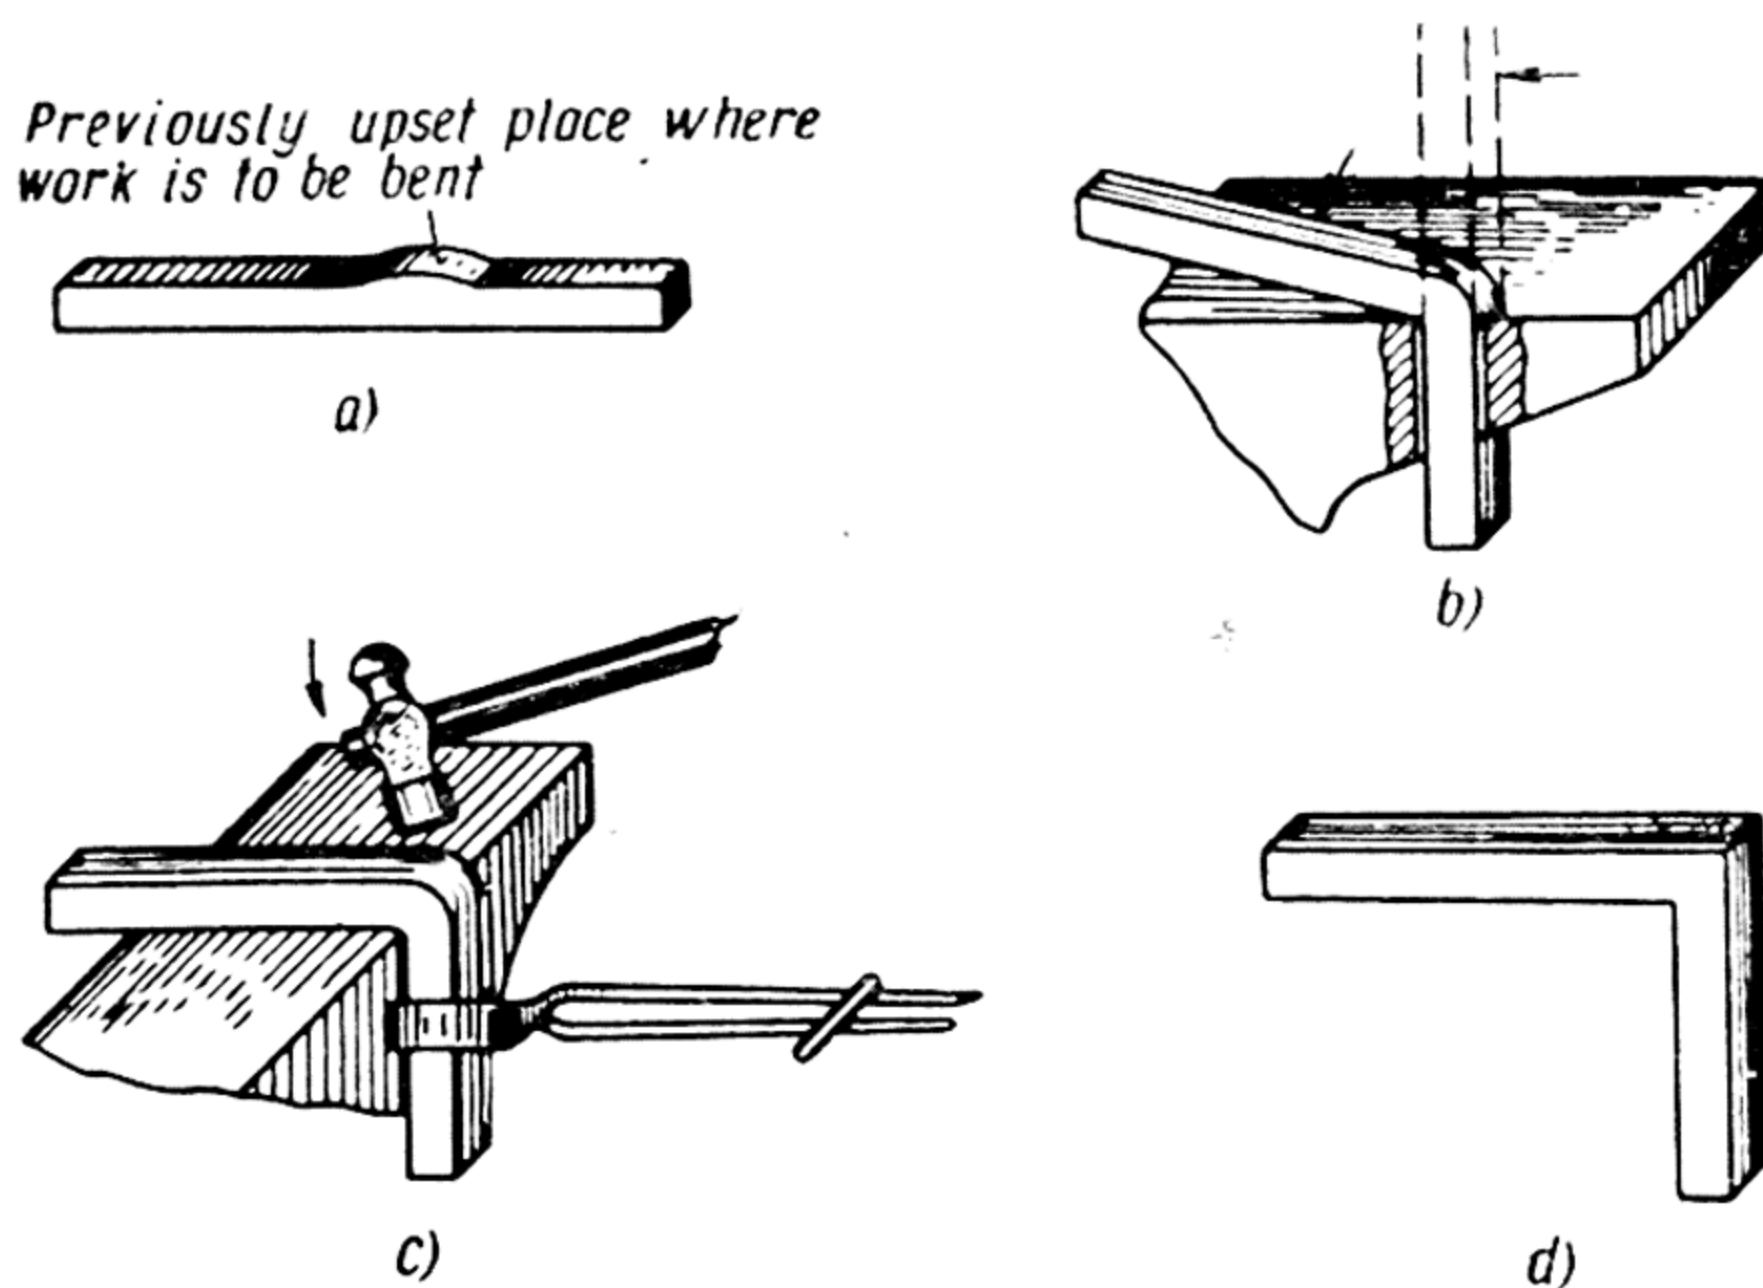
Bending a piece of work at right angles, with a sharp corner at the bend
